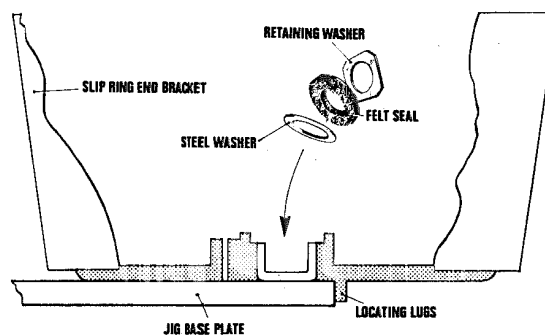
Method of assembling the felt seal in the slip ring end bracket
